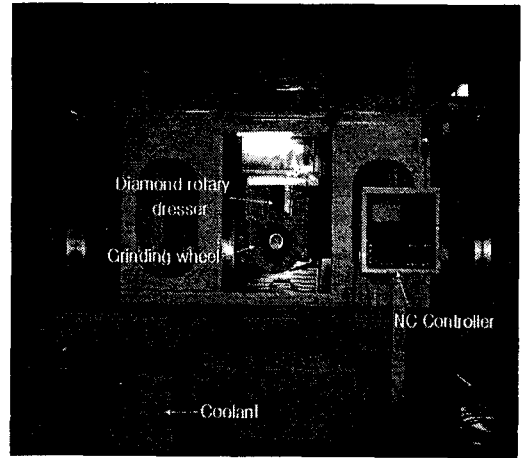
Photograph of CNC creep-feed grinding machine with continuous dressing device
